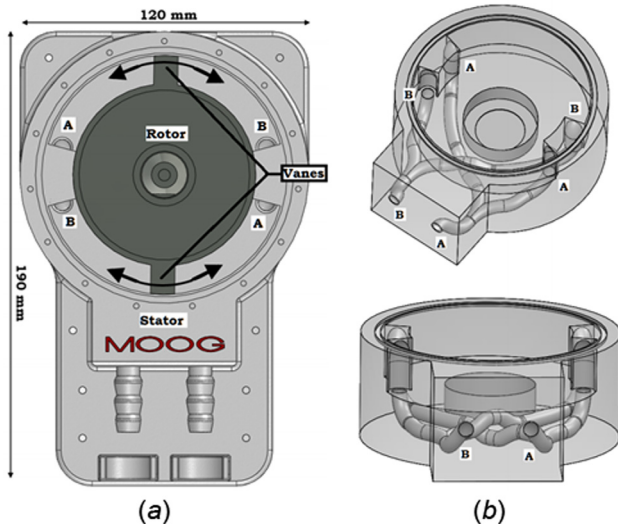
Drawings of the vane motor. Coupled cross-linked fluid in/outlets are labeled either A or B. (a) Top view drawing of the vane motor with cover removed. (b) Transparent drawing of the base stator illustrating the cross-linked fluid ducts.
